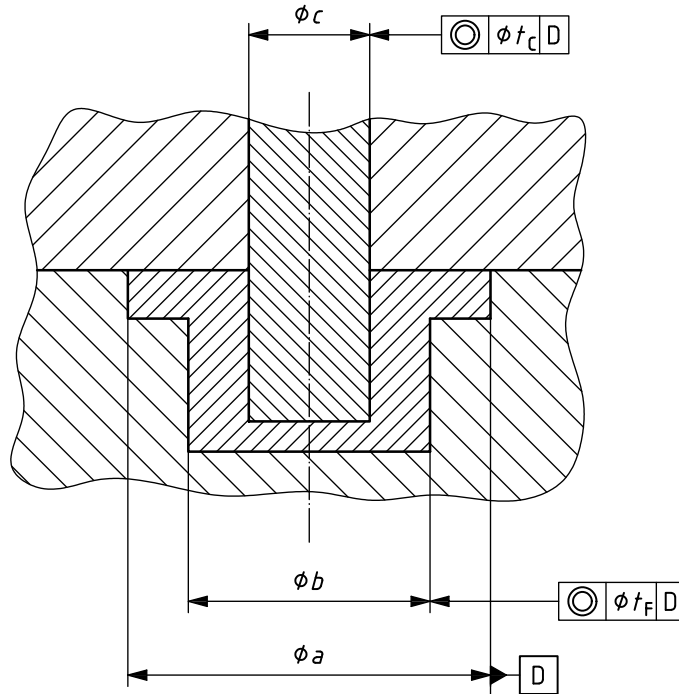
Example of coaxiality tolerances for a moulded product
